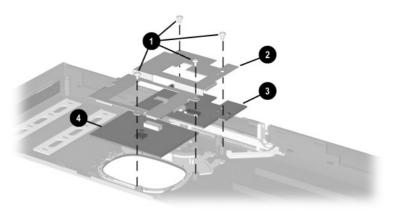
Removing the TouchPad Components on TouchPad Models
